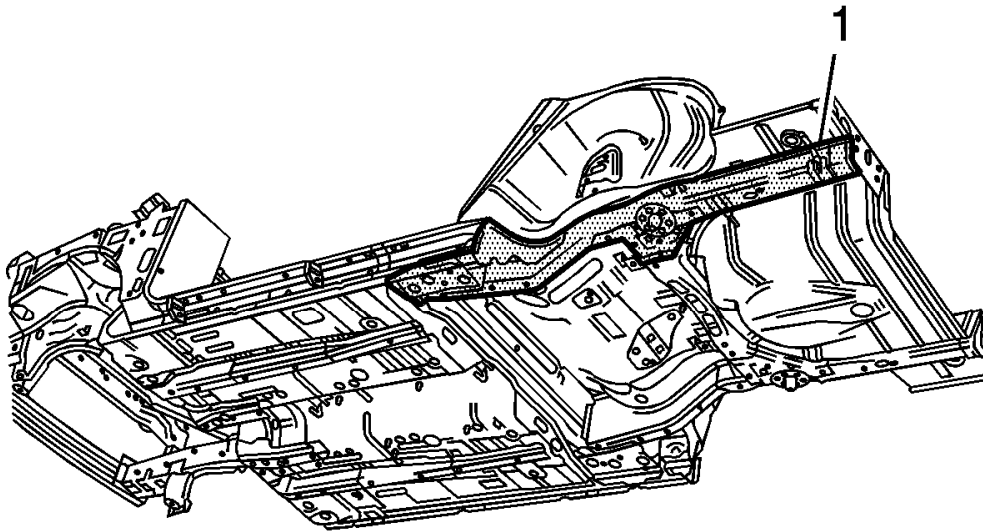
Underbody Rear Side Rail In Position For Welding
